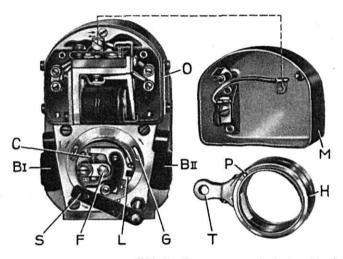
Magneto-Generator DVAR (Interrupter end view) with dust cover and interrupter housing removed.
